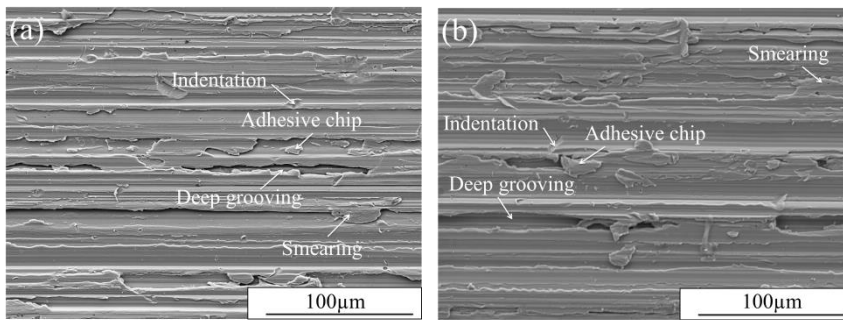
Surface topography and surface defects after grinding by 60# grit size abrasive, 60% machine power and without lubricant: (a) austenitic stainless steel 304L, (b) duplex stainless steel 2304.
